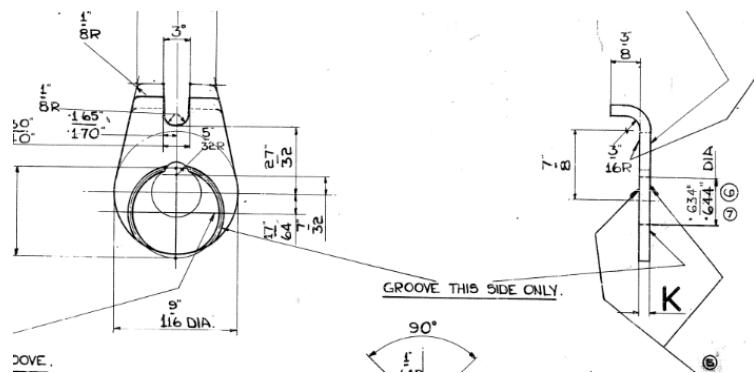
Laygear thrust washers 88G324 and 88G325.
